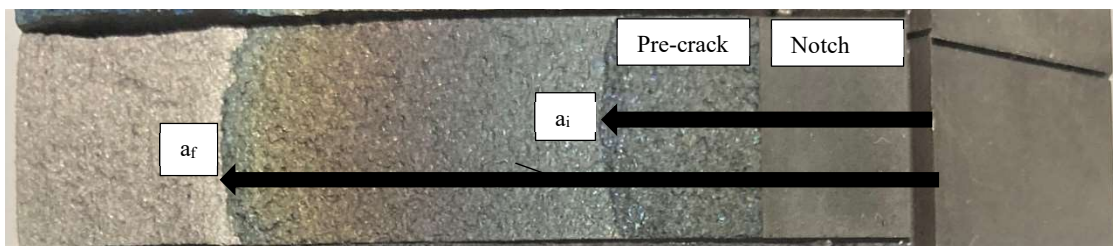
Fracture surface of 740-2 with crack growth from right to left.
